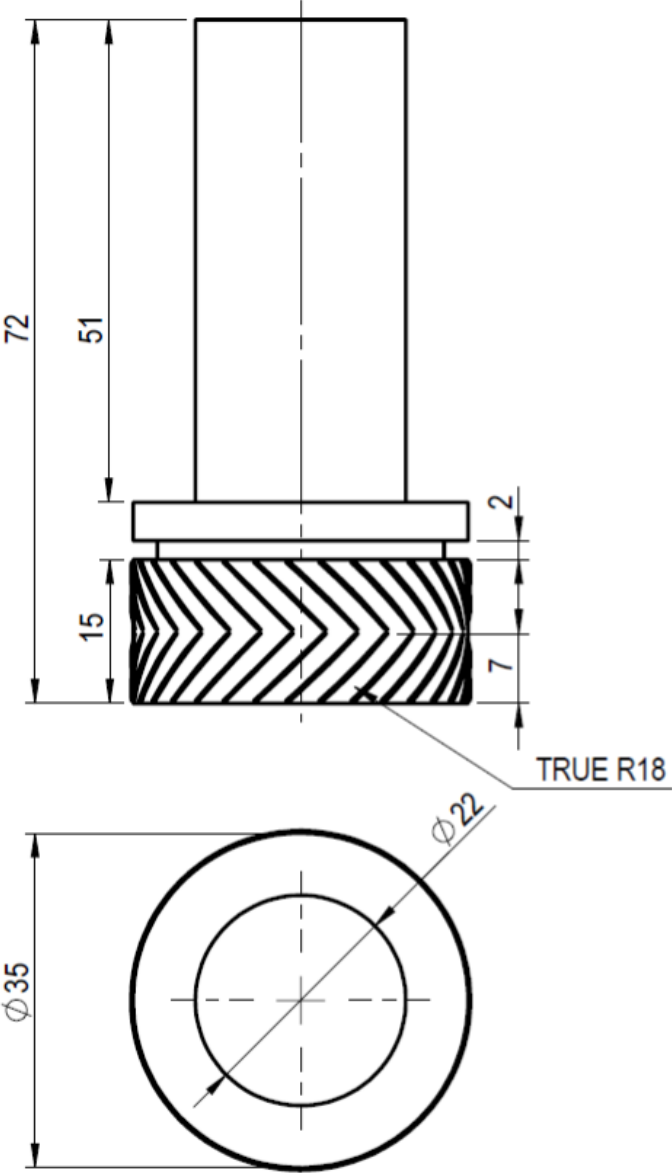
Technical drawing of the tool used in the production of walls by FRAM.
